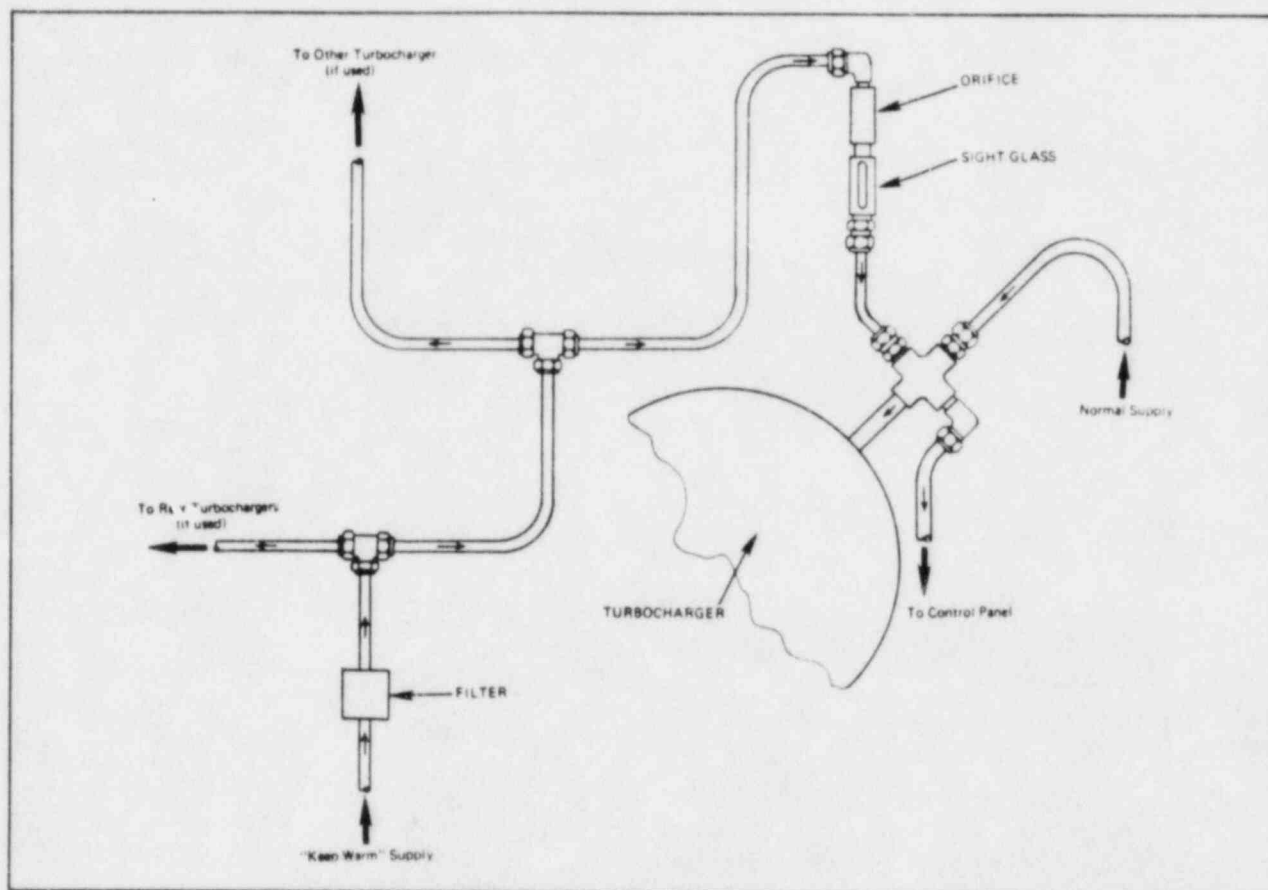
K-5. Turbocharger Bearing Drip Lubrication System
